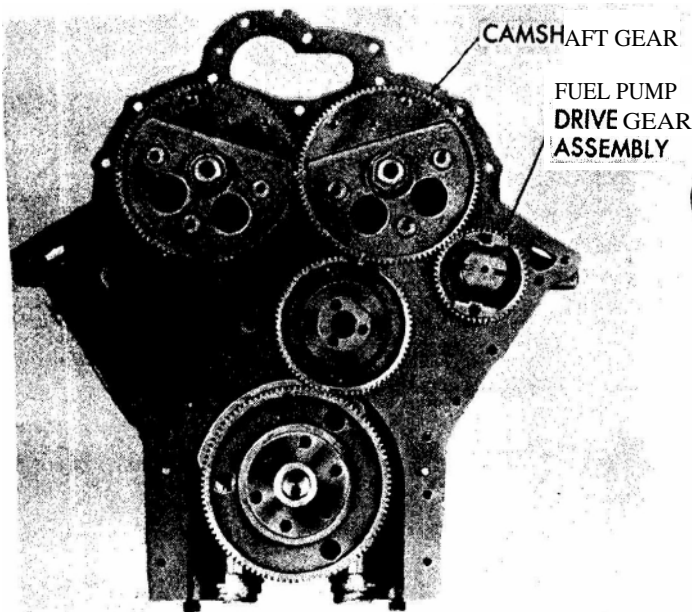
Fuel pump drive gear mounting and details (6 V engine shown).
